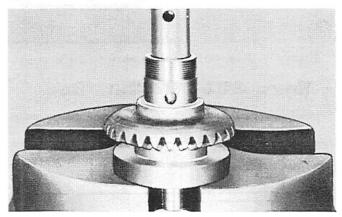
Reinstalling Propeller Gear on Propeller Shaft
